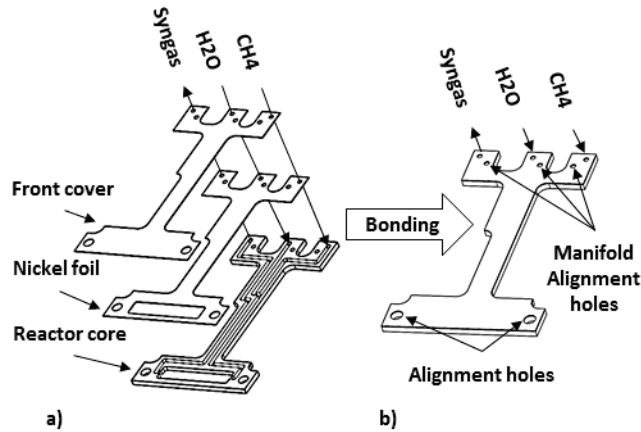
a) Layers stack making the demonstrator elementary reactor, b) Demonstrator ready for testing after diffusion bonding of each layers.
